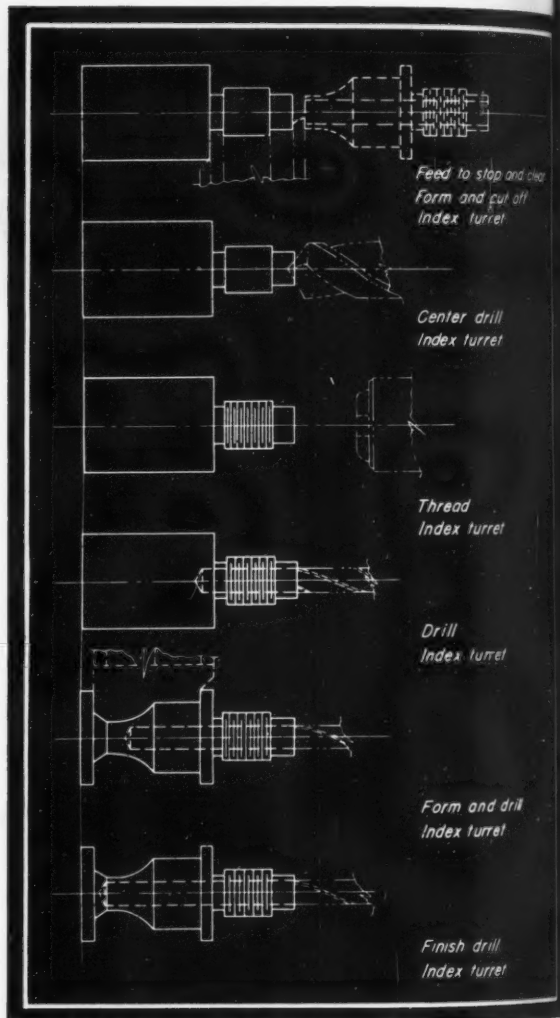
Long forming cuts require a set of several or more forming tools, finishing the outer surfaces first
